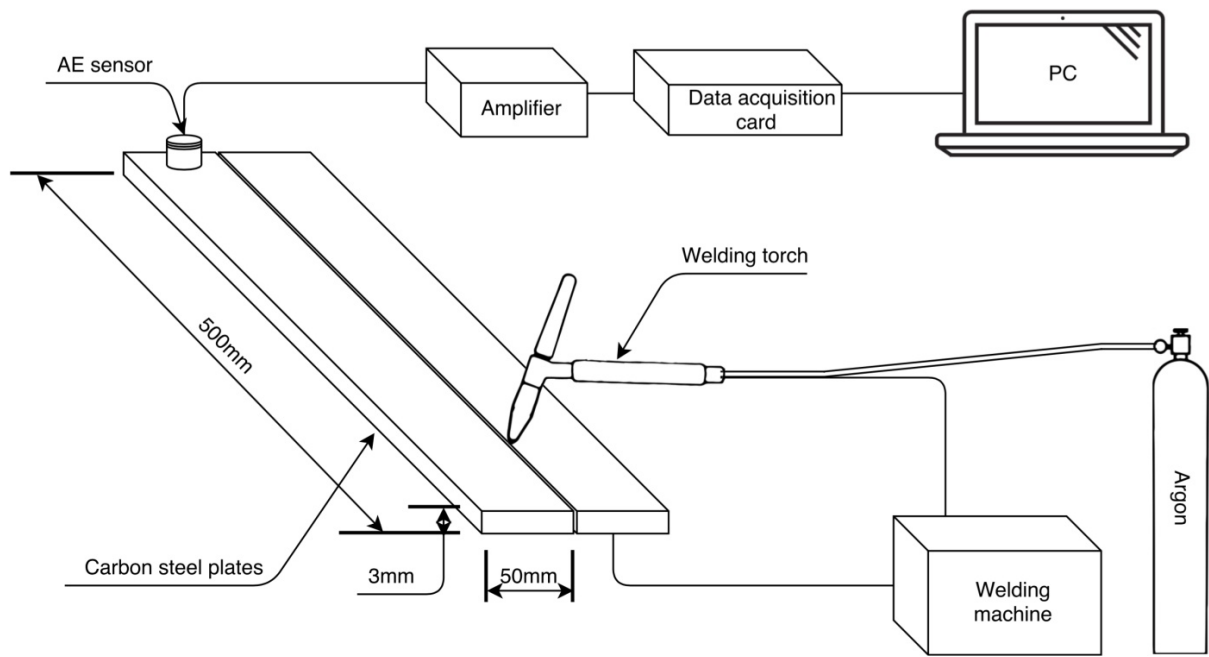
The illustration of the TIG welding experimental setup.
